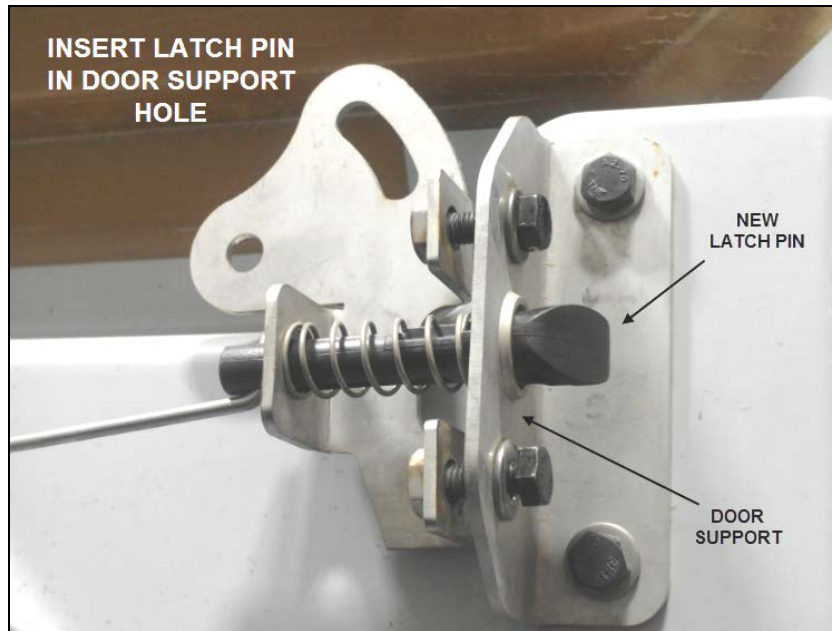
PIN ASSEMBLY TO DOOR SUPPORT INSTALLATION
